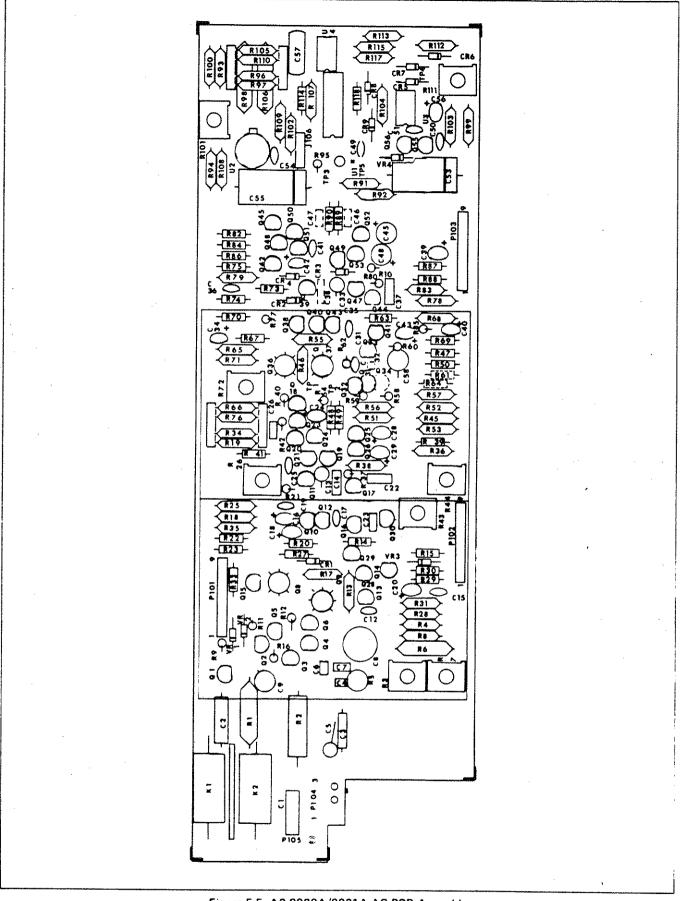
A2 8920A/8921A AC PCB Assembly
